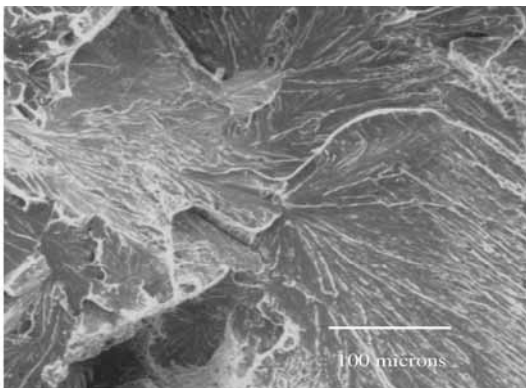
SEM picture of a cleavage fracture surface on a 1018 steel. (160x)
